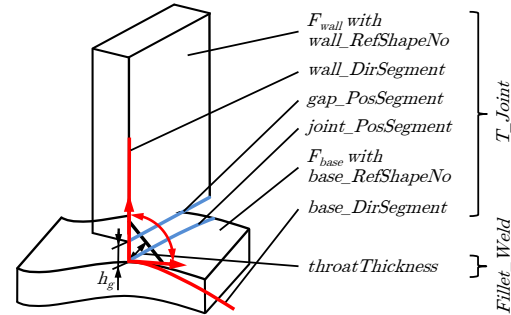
Weld feature description for T-joint and fillet weld seam.
